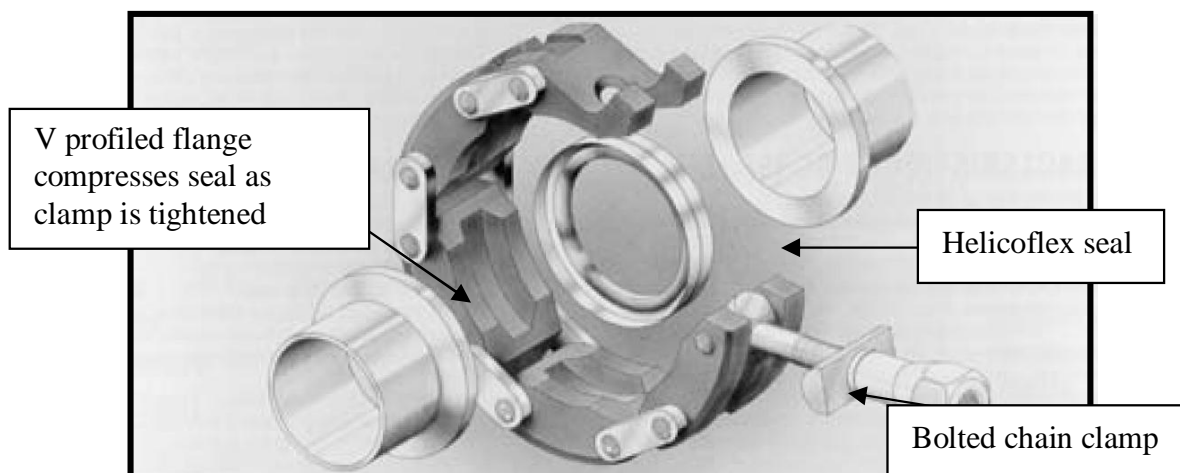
Remote Handling type V-band flange with bolted chain clamp
